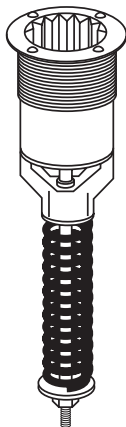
Flush-Type Full Internal Pressure Relief Valve.
